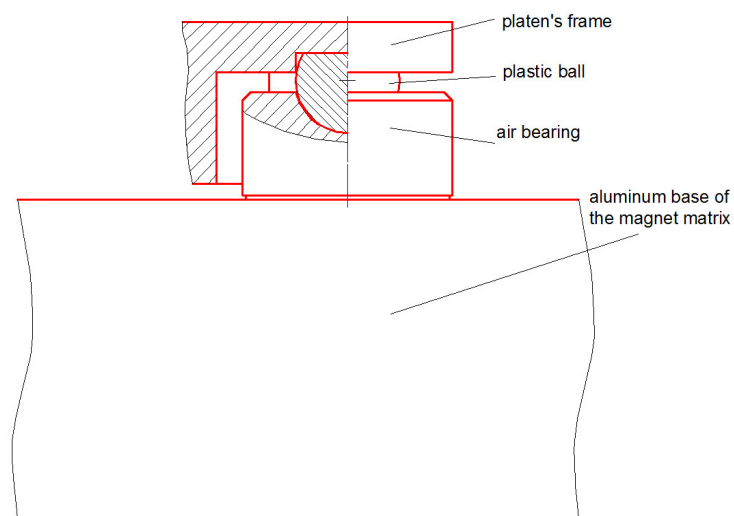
Assembly of the platen's frame, a plastic ball, and an air bearing.
